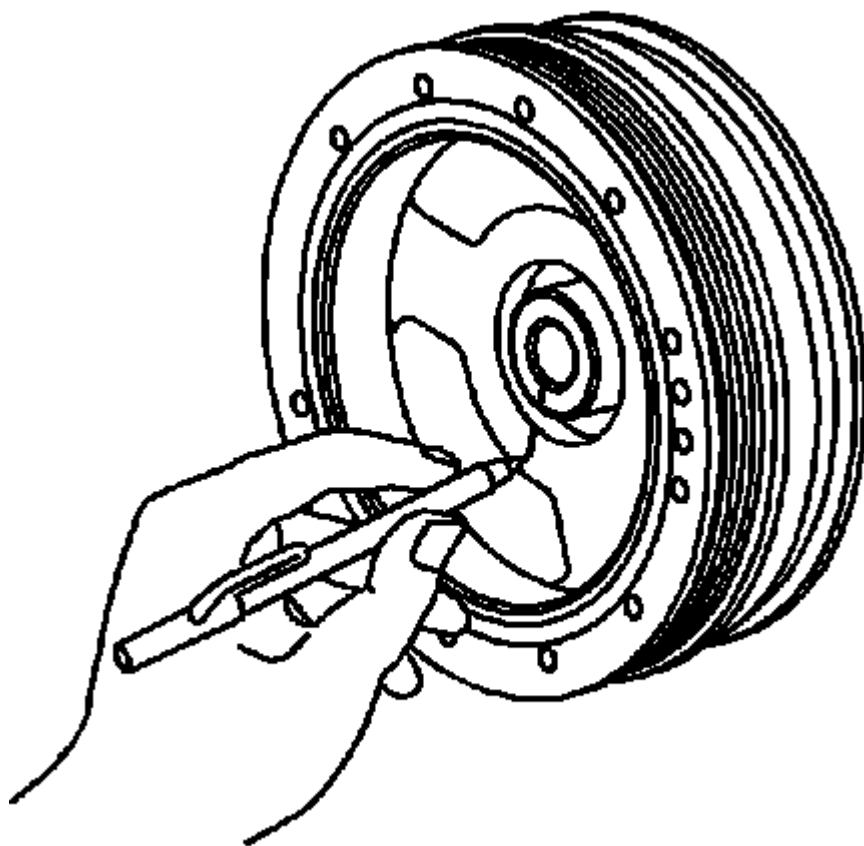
Marking Crankshaft Balancer & End Of Crankshaft
